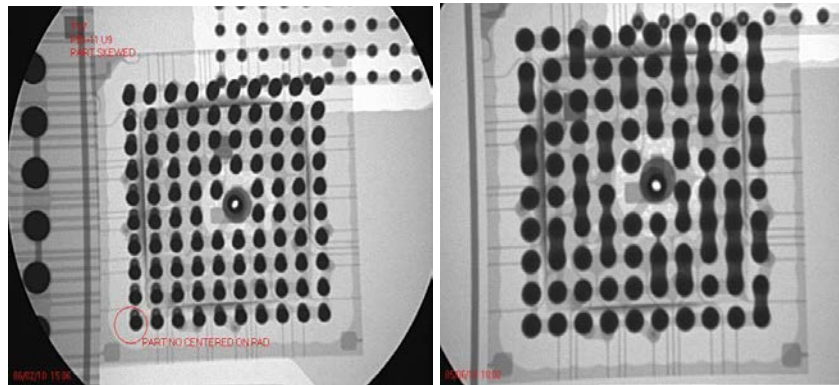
Skewed Pad on the left and solder bridging on the right
